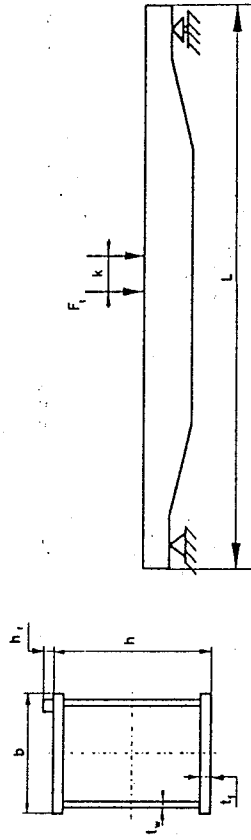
Cross section of the welded main girder of overhead travelling crane
